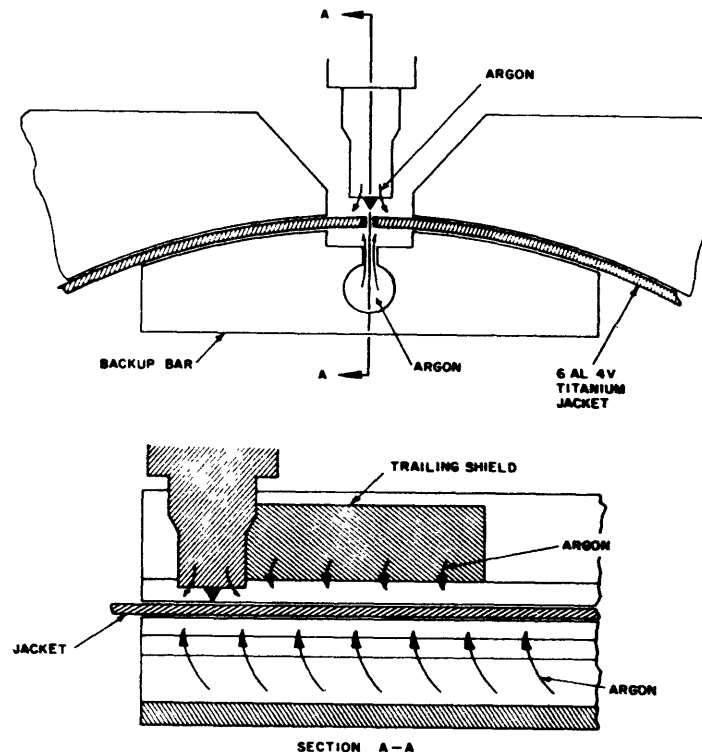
Fusion Welding of 1/32-Inch Titanium Jacket
